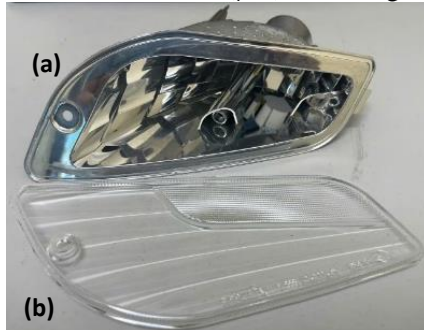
Products for welding of car turn signals: (a) body, (b) lens
